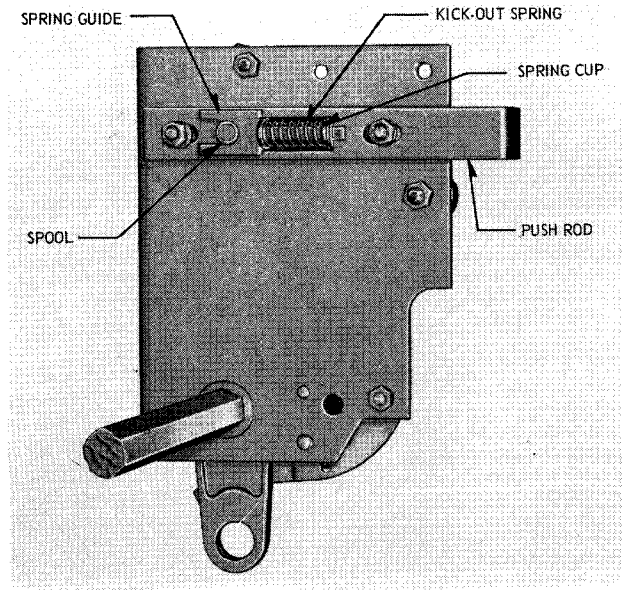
Left View of Operating Mechanism Assembled to give Instantaneous Trip Operation
